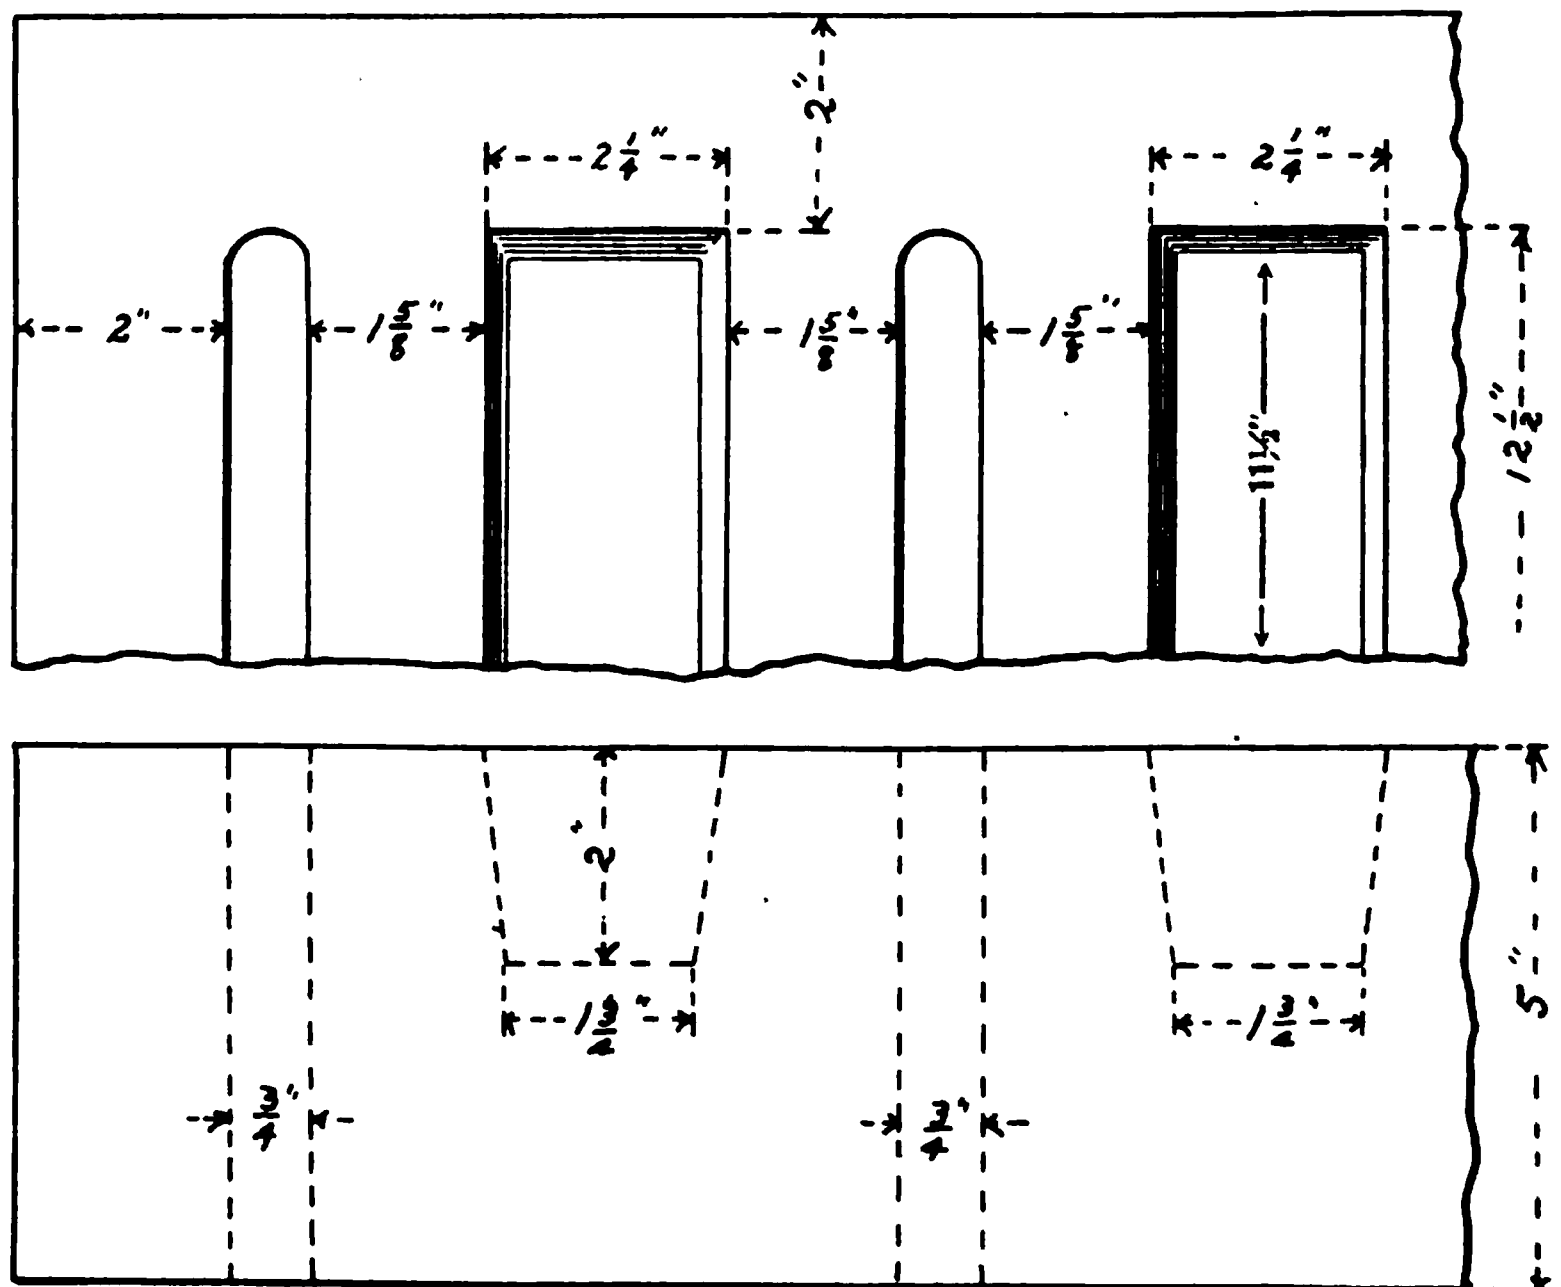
MOLD FOR CHILL TEST SPECIMEN.
